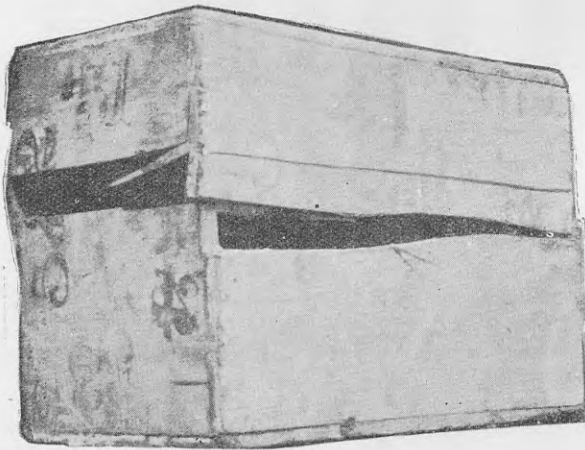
TYPICAL FAILURE OF STYLE I BOX (UNSTRAPPED).
